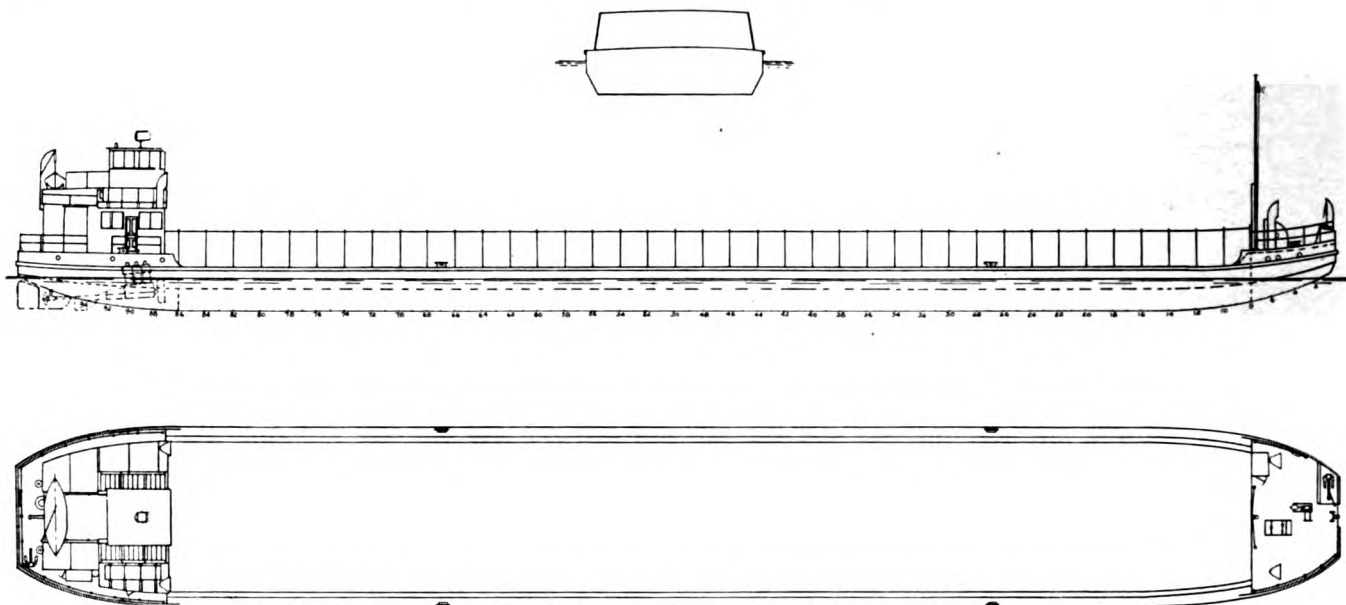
SHOWING THE OUTBOARD PROFILE AND DECK PLAN
